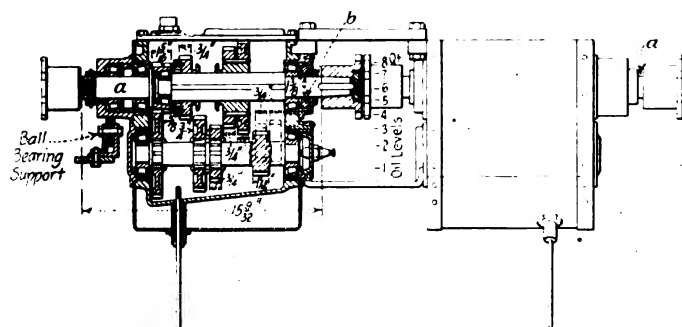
CONSTRUCTION AND PRINCIPAL DIMENSIONS OF THE TWO GEARSETS TESTED
